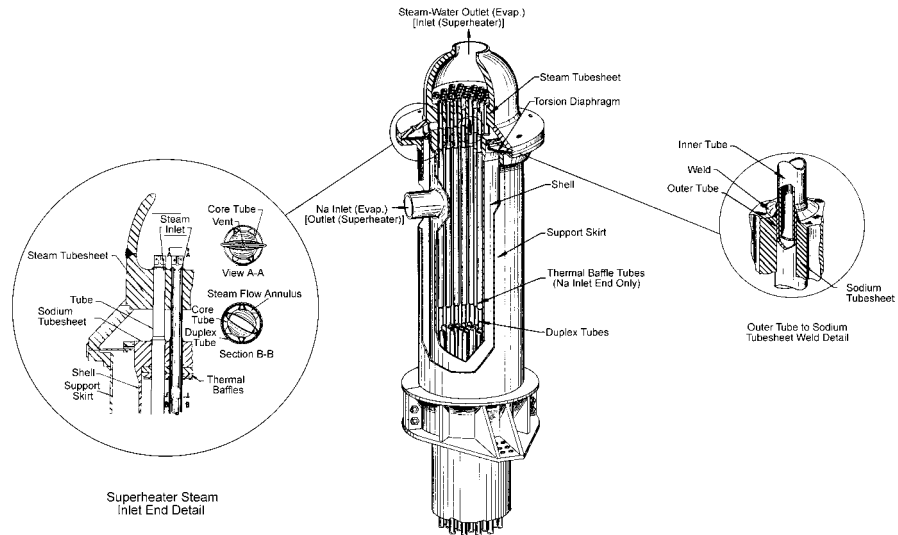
SUPERHEATER AND EVAPORATOR ASSEMBLIES.
